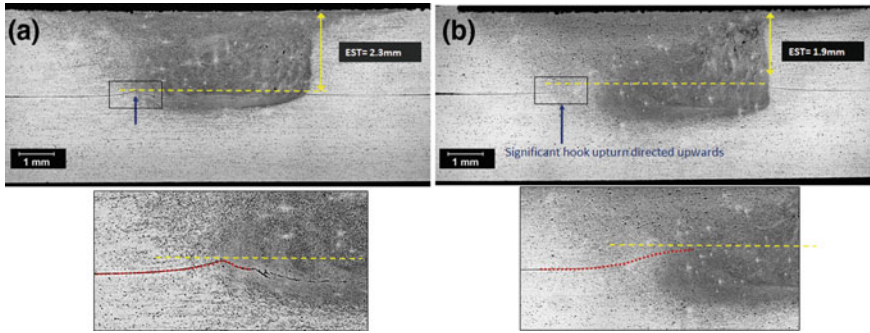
Joint cross section showing hook upturn and effective sheet thickness for welds made between AA7055 (2.5 mm) and AA7055 (2.5 mm) using a 3.1 mm long pin b 3.4 mm long pin
